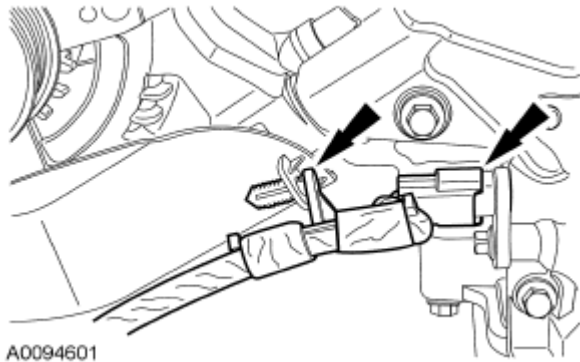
Locating Crankshaft Position Sensor Electrical Connectors & Wiring Retainers
